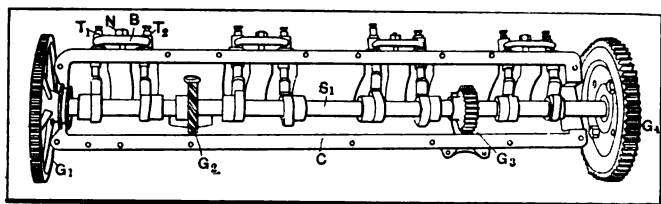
Camshaft assembly of the 30-horsepower Corbin motor, illustrating the manner of actuating the valves
